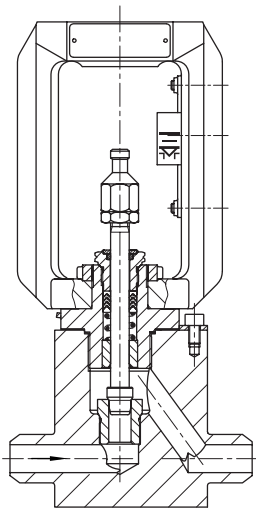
· Type 3252 High Pressure Valve as globe-style valve with welding ends
